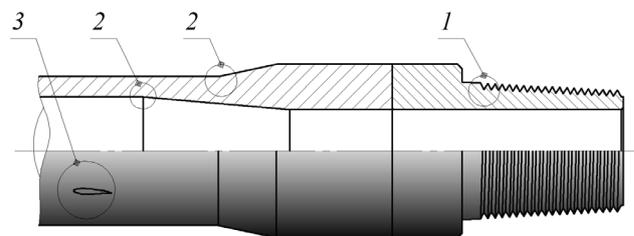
Places of occurrence of fatigue cracks in drill pipes:
